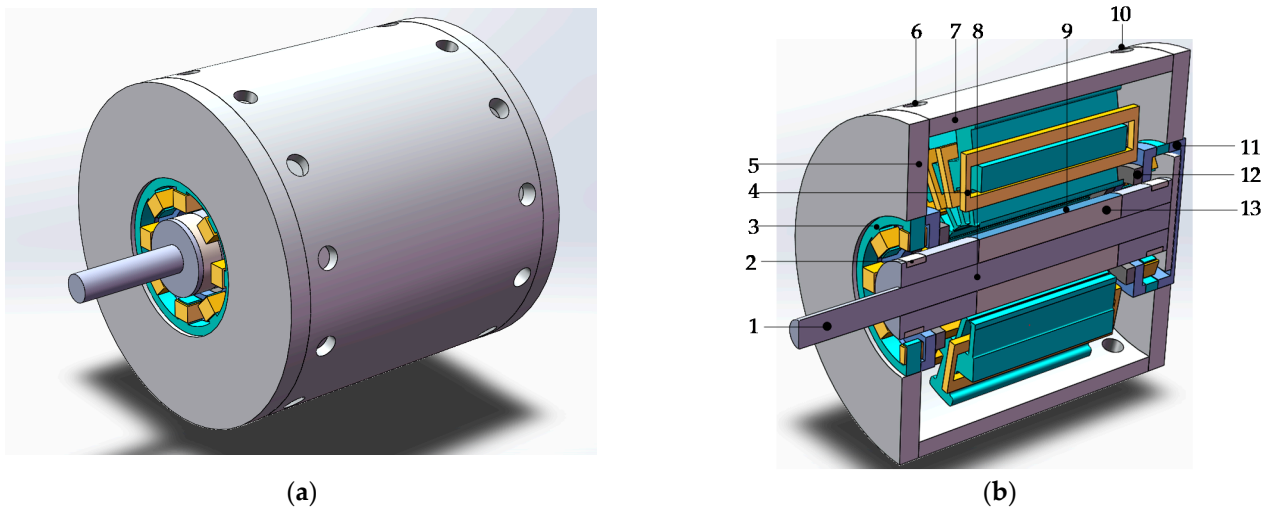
Motor structure: (a) Model; (b) Configuration of the high-speed PM motor: 1—Shaft; 2—Rotor of radial AMB; 3—Stator of radial AMB; 4—Motor stator; 5—Cover; 6—Outlet; 7—Shell; 8—Composite rotor; 9—Retaining sleeve; 10—Inlet; 11—Axial AMB; 12—Heat fin; 13—PM.
